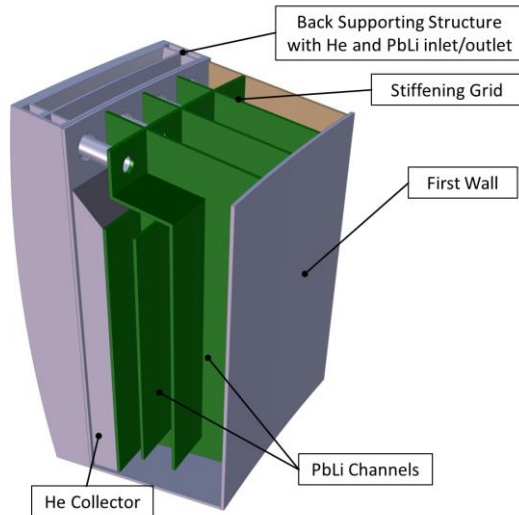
DCLL breeder blanket module showing a cut-away view of the liquid metal channels and the attached BSS with manifolds.
